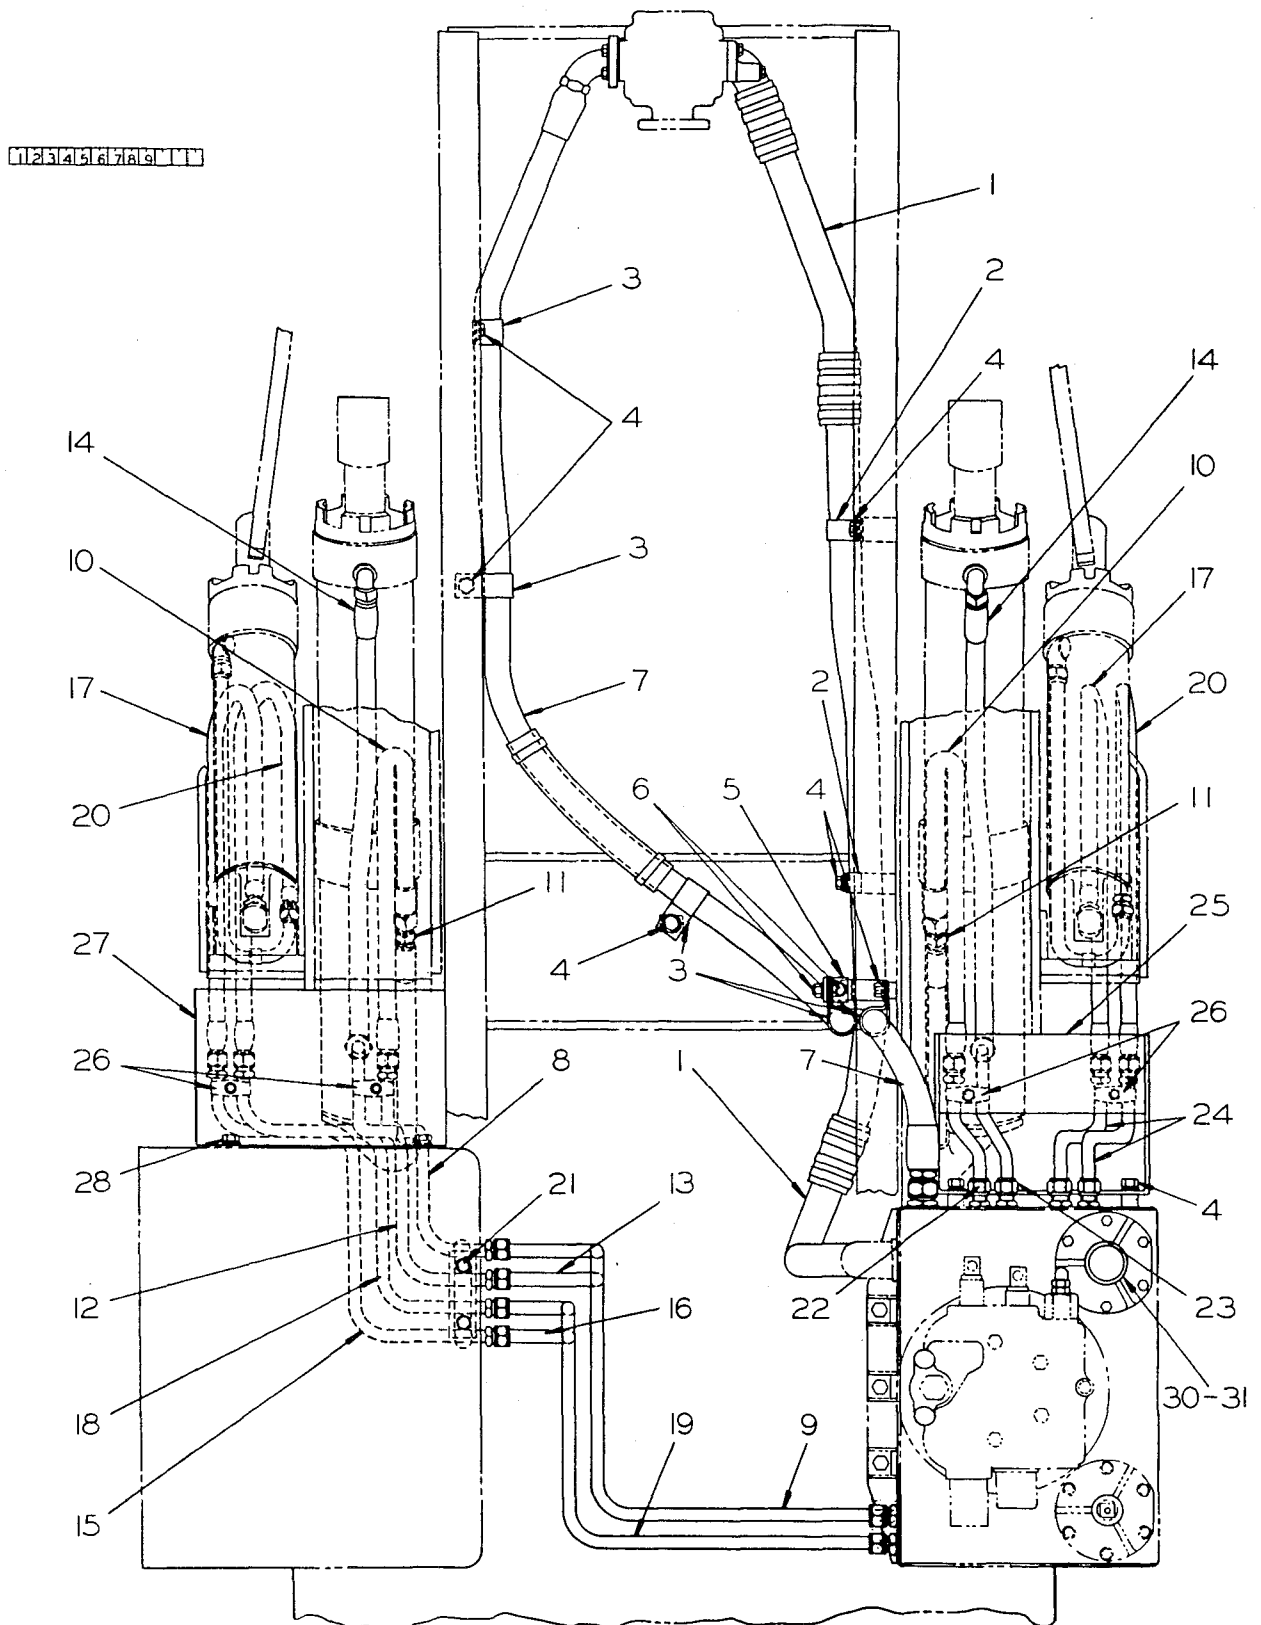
HYDRAULIC PIPING GROUP - TOP VIEW
